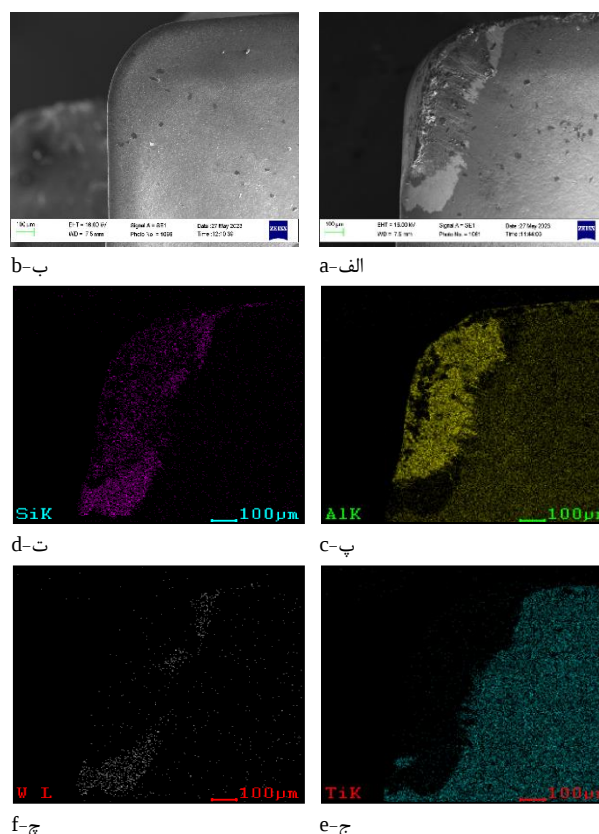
SEM image and surface map analysis of the cutting tool in cryogenic mode at cutting speed of 120 m/min; (a) before machining; (b) after machining; mapping analysis with presence of (c) Aluminium; (d) Silicon; (e) Titanium; (f) Tungsten
